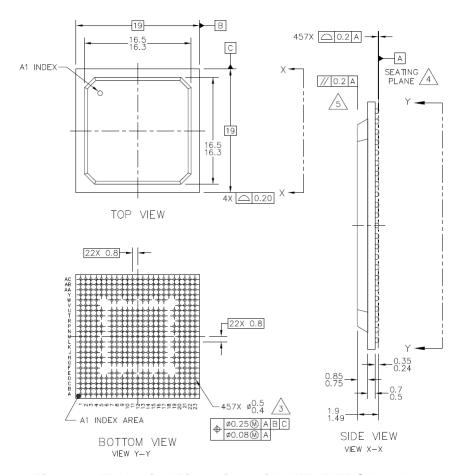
Mechanical Dimensions of the WB-TePBGA package
